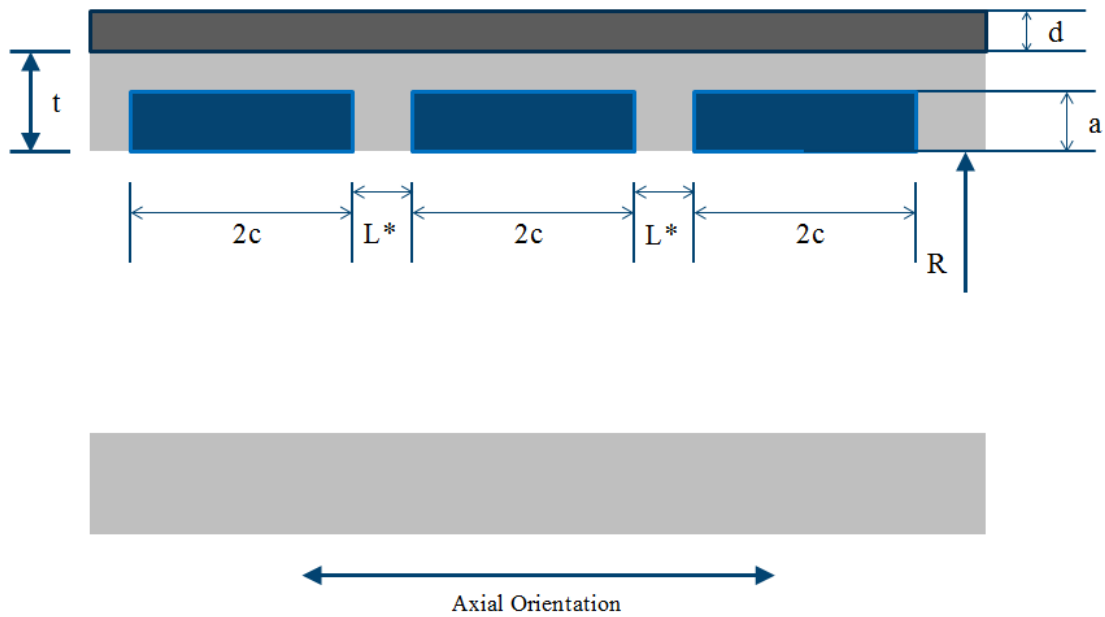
2D Planar Sketch of Multiple, Axial, Rectangular, Part Through-Wall Cracks on ID
